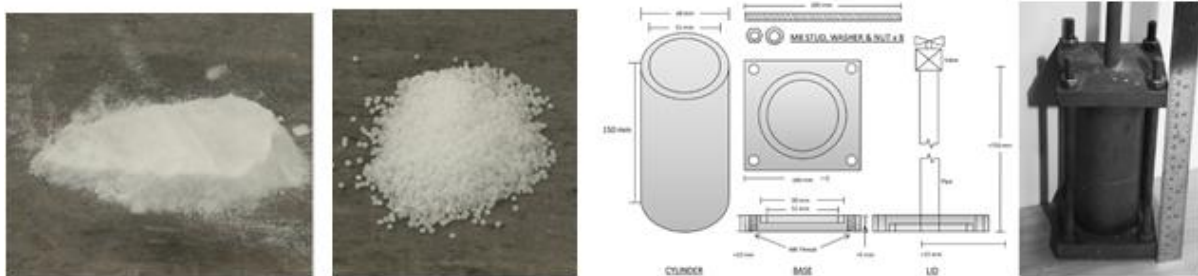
Different types of salt or salt bodies and technical data for mould-making [15]
